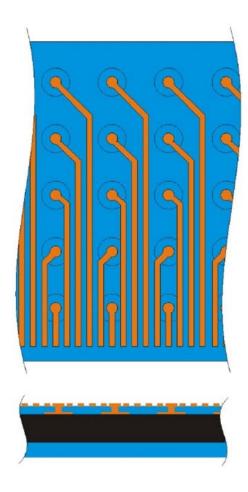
At any given lead pitch, solderless assembly methods can significantly reduce both layer count by freeing up routing space and assembly height as solder often makes up half of the overall height of a mount package.
